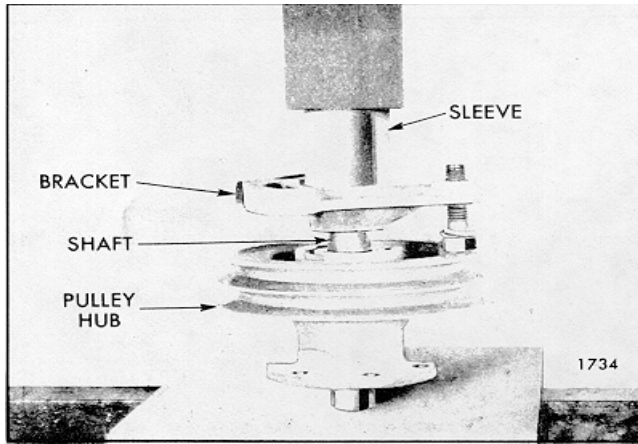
Installing Adjusting' Bracket and Bolt on Fan Shaft
